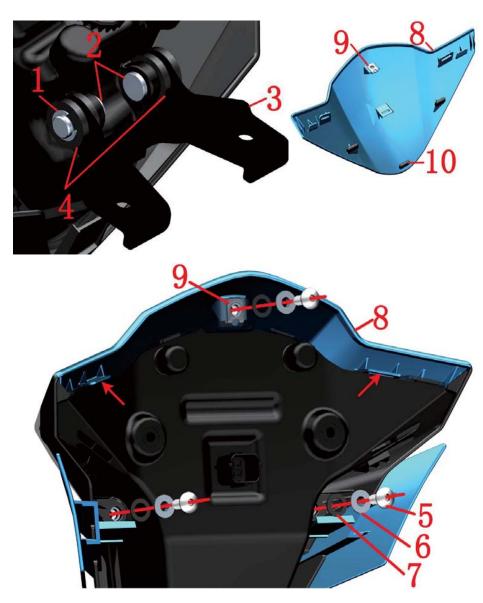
F	RONT FORK	Headgear headlight component 1	CHK
